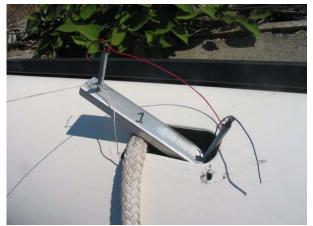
Inserting the backing plate into a halyard exit opening. Note the red and green seizing twine attached to the threaded alignment rods. The white line is to keep back tension on the assembly as it is moved into position.
